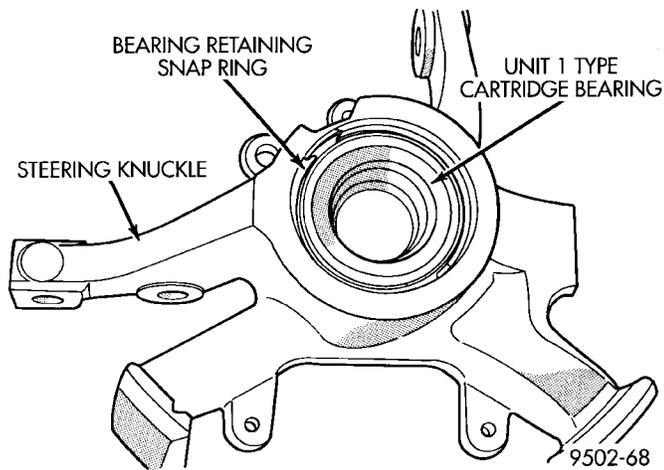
Hub Bearing Retaining Snap Ring Installed
